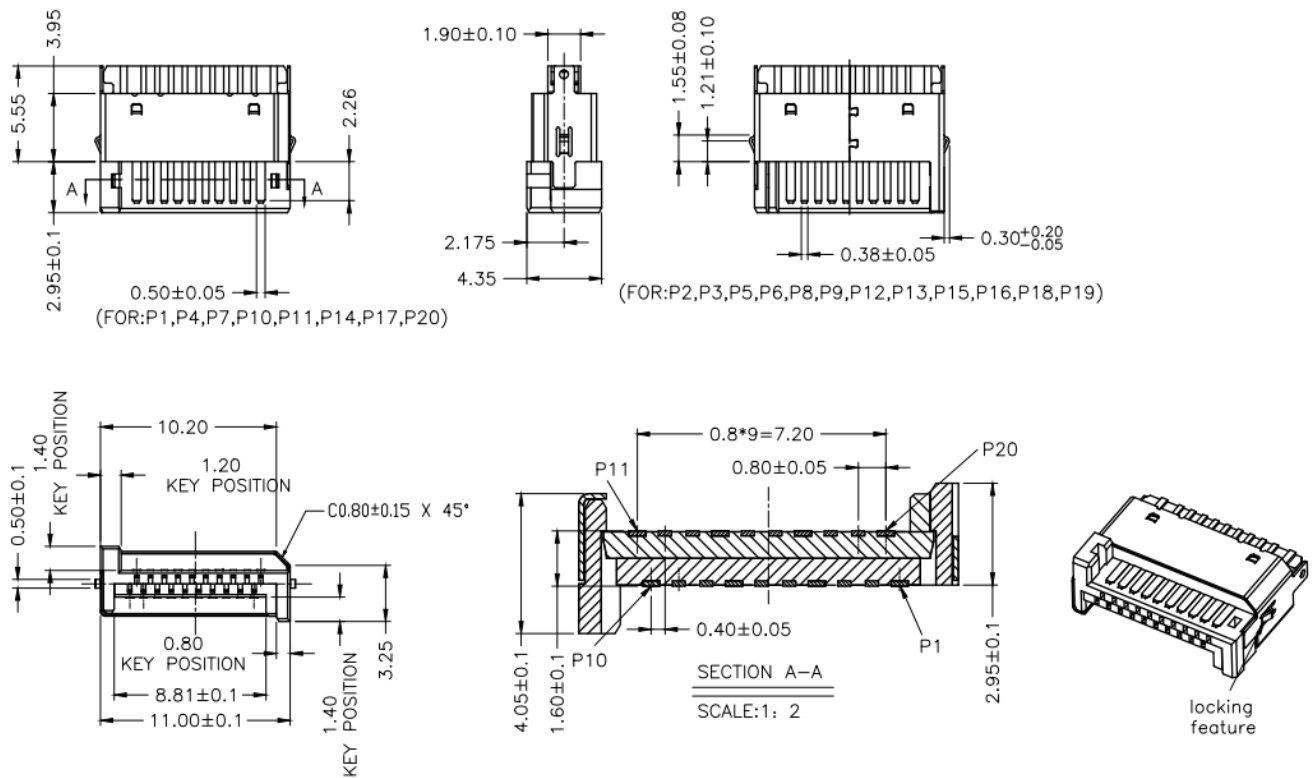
shows the reference design of the Key-A 20-pin plug, while Figure 2-6 shows the reference design of the Key-B 20-pin plug. The Key-A plug can only be plugged into the Key-A header. The same is true for the Key-B plug and header.
